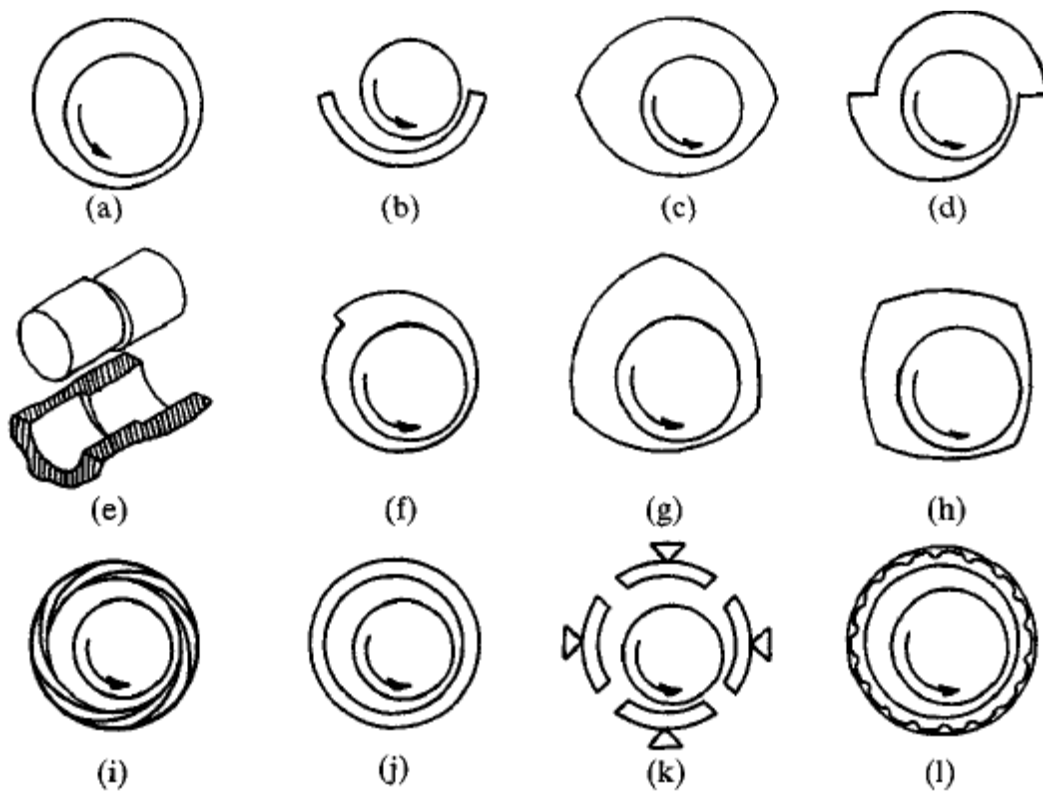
Shapes of bearings used for the journal bearing system (a) Full journal bearing profile (b) partial bearing; (c) elliptical bearing profile (d) offset type bearing; (e) rocking type journal bearing; (J) pressure dam type bearing; (g) three-lobe type bearing; (h) four-lobe bearing; (l) multileaf type bearing; (j) floating ring type bearing; (k) pivoted pad bearing; (l) foil type bearing.
